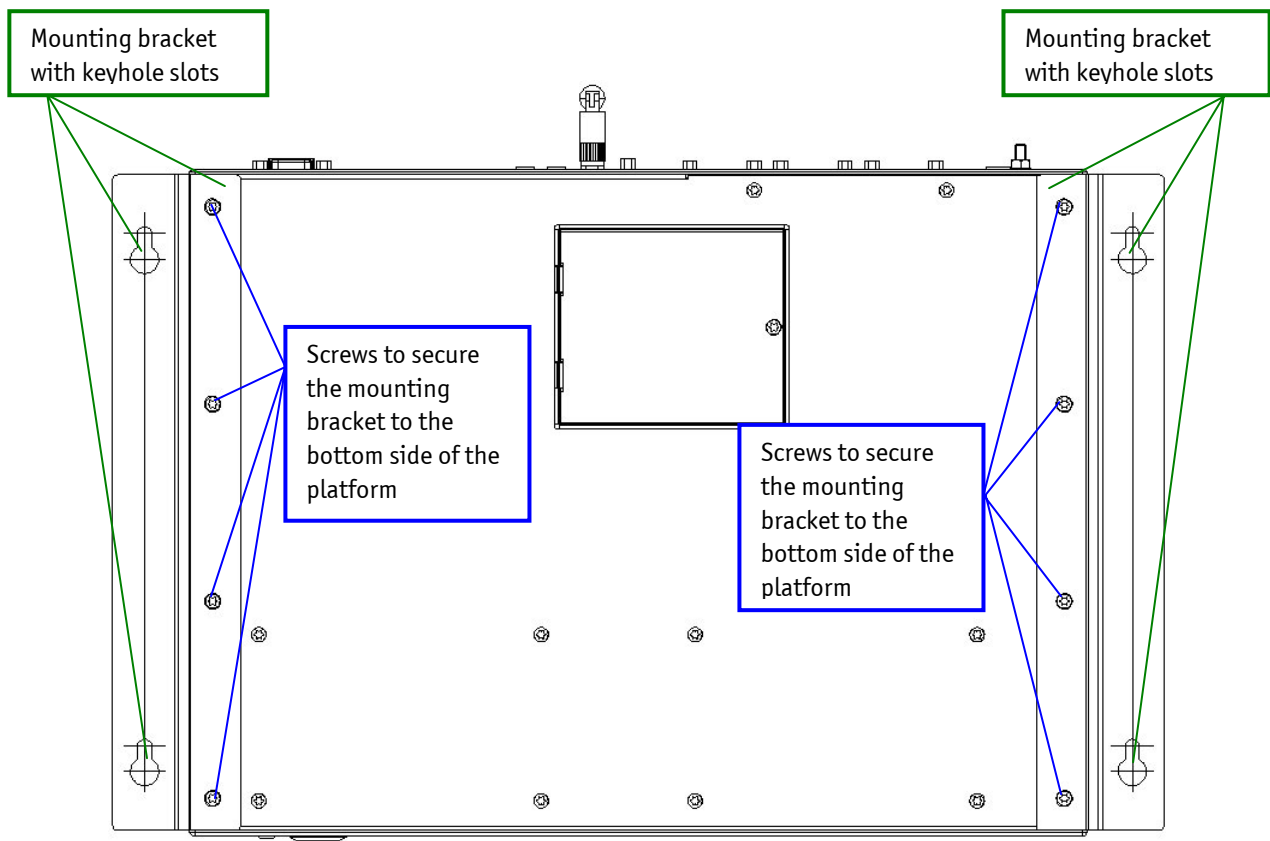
Bottom side with attached mounting brackets (the side with interfaces is upward mounted)
